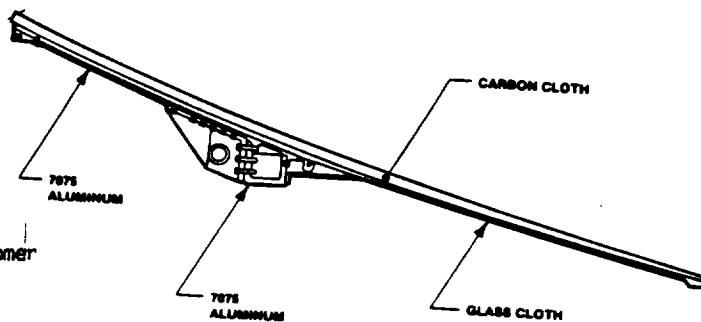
NOZZLE EXIT CONE ASSEMBLY
